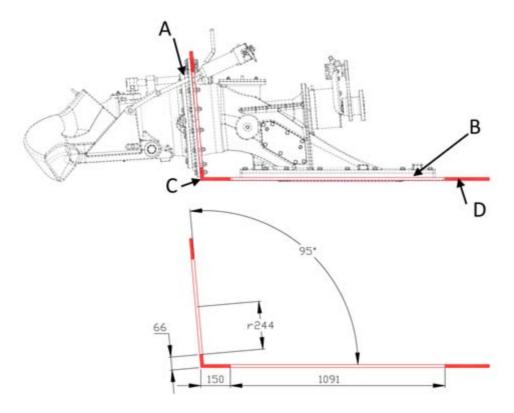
Hole positions in the boat hull (welded installation)
